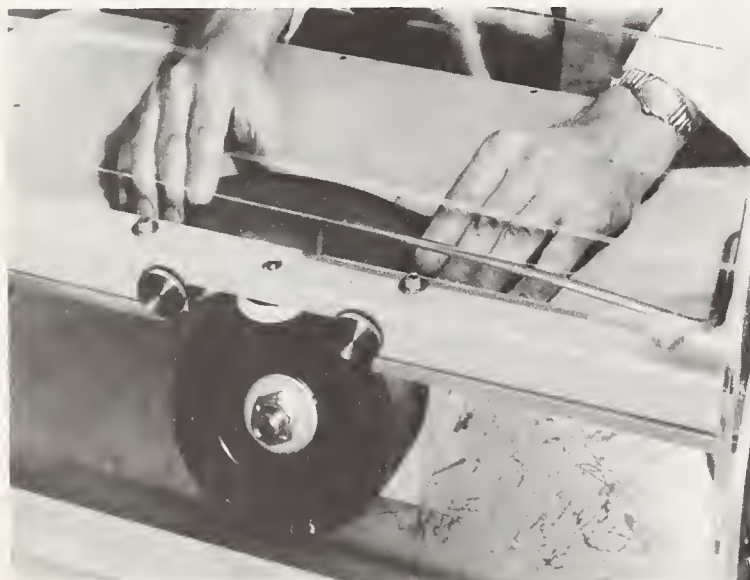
Lawrence Livermore Laboratory chamfering fixture.
